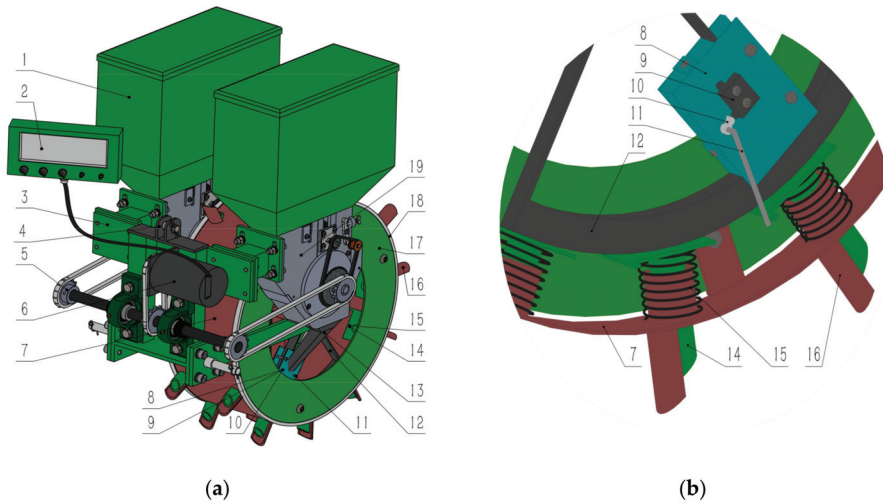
3D model of the novel precision seeder for dry direct-seeded rice with film mulching: (a) Axonometric drawing of the entire machine; (b) Partial enlarged view. 1. Seed tank 2. Control box 3. Frame 4. Suspension system 5. Chain drive system 6. Stepping motor 7. Roller 8. Dividing seeds box 9. Touch switch 10. Micro CAM 11. Crank 12. Drive slideway 13. Seed tube 14. Telescopic pipe 15. Reset spring 16. Mini shovel 17. Protection plate 18. Rubber ring 19. Combined type-hole seed-metering device.
